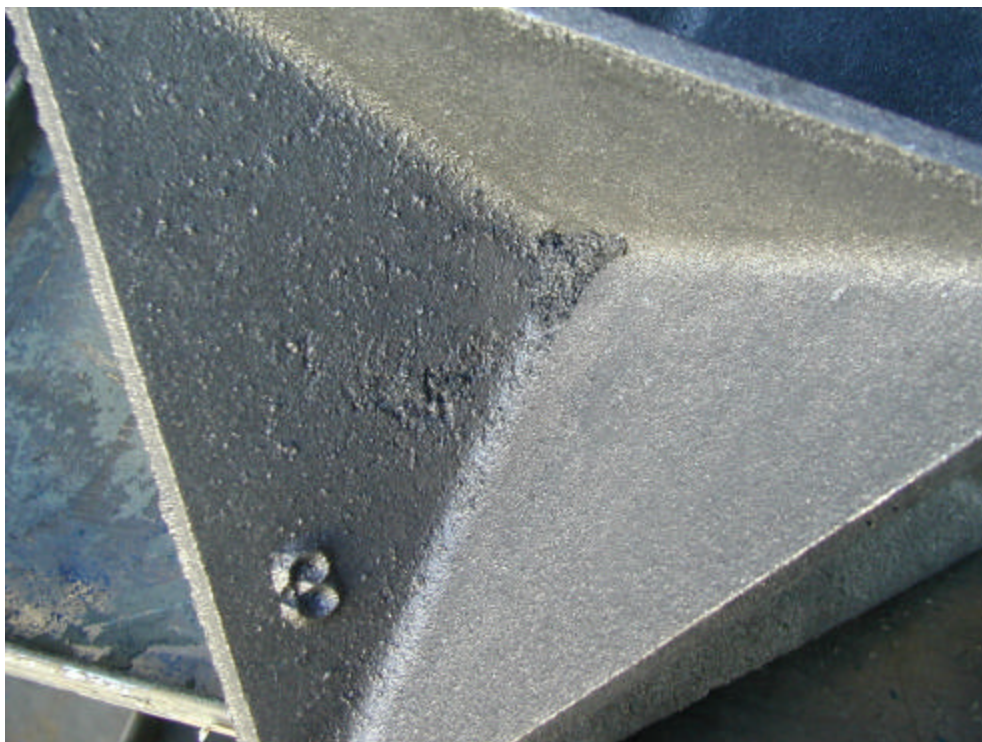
Mold FN002 cavity 3 casting ranked 2 Of 9.
